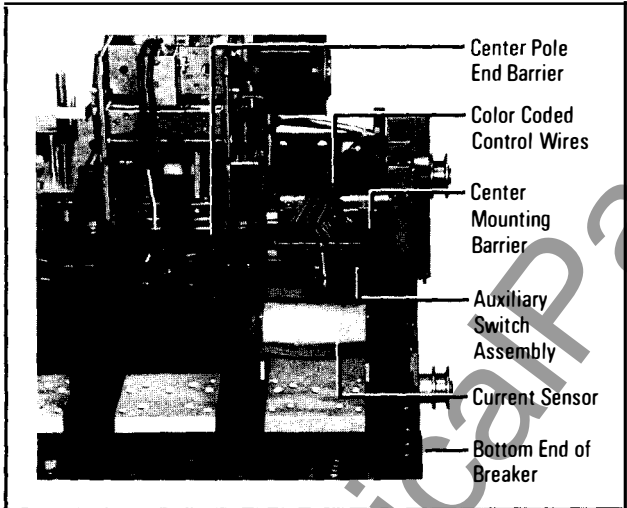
View of Auxiliary Switch Assembly Installed with Front Cover and End Barrier Removed
